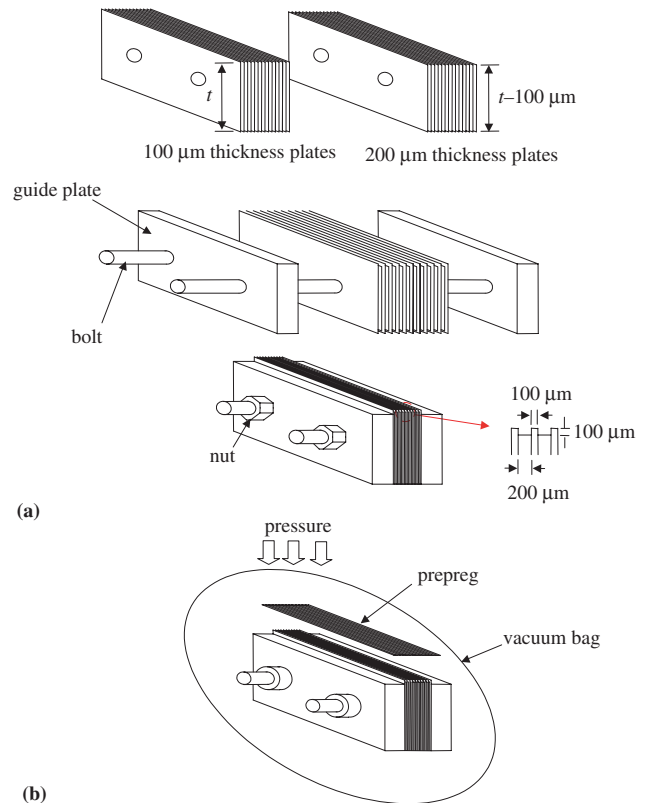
Fabricating process of the concave mold and specimens (patent pending): (a) mold fabrication method, (b) molding process for the composite with many small grooves.
